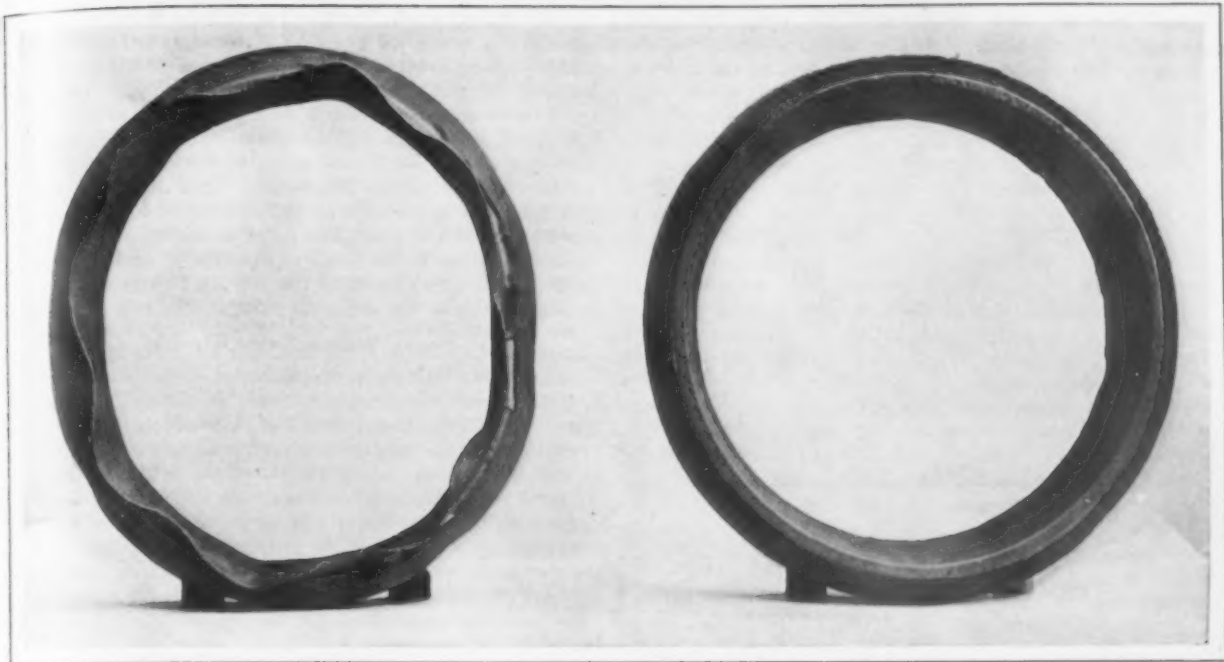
Malleable Automobile Clutch Ring Machined from 7/16 In. to 1/4 In., Subjected to Heavy Blows to Test Ductility and Strength of Core
